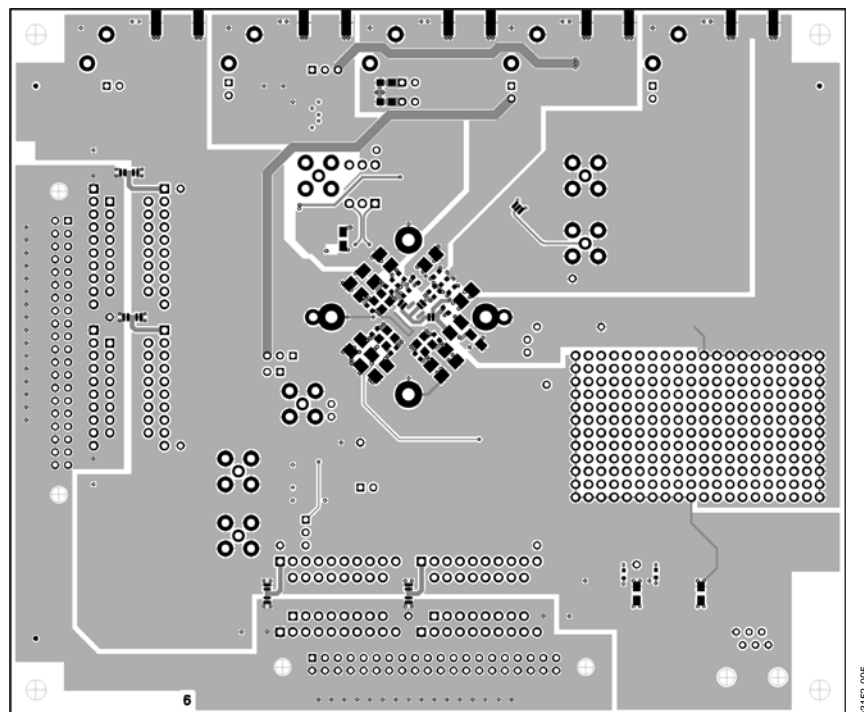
PCB Assembly, Layer 6 Metal, Rev. F Evaluation Board
